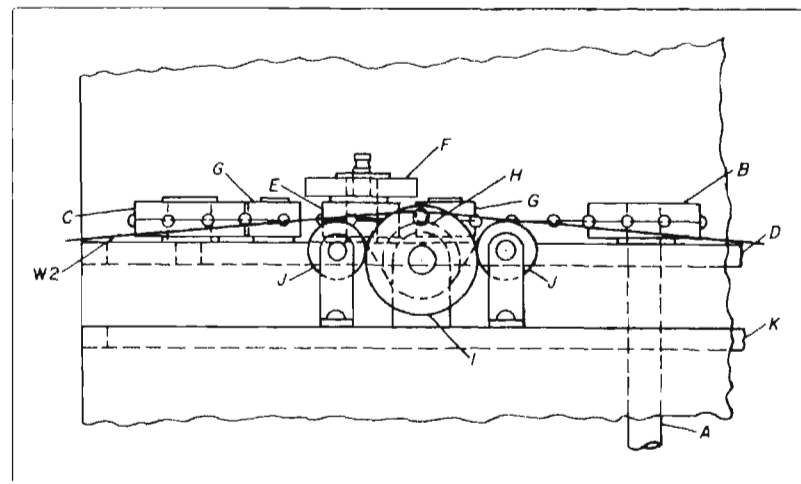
Bead chain drive of discs *F* and *I* requires but little torque. This is a front view of the mechanism.
